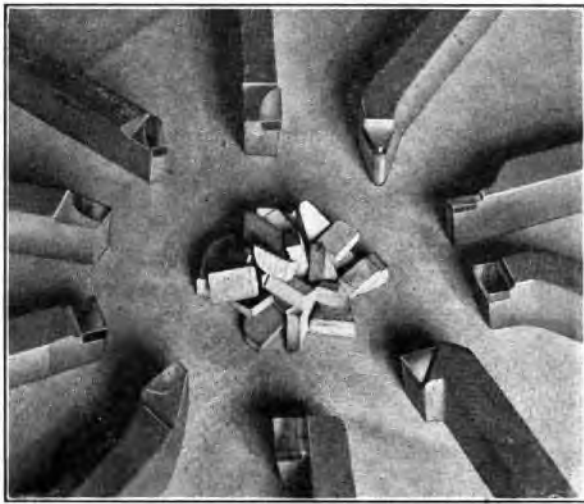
SOME TYPES OF TIPS AND TOOLS.
